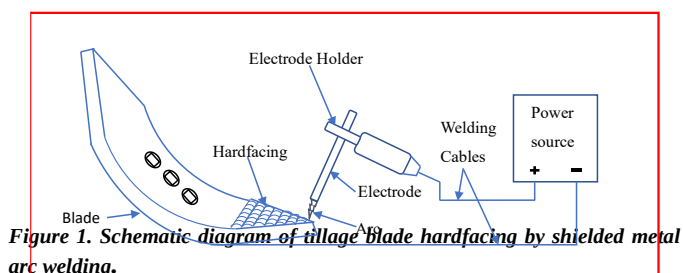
Schematic diagram of tillage blade hardfacing by shielded metal arc welding.
